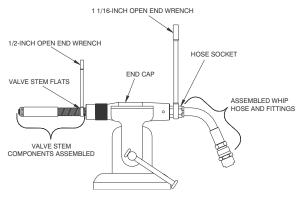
Thread the Hose Socket from the Valve Stem.
